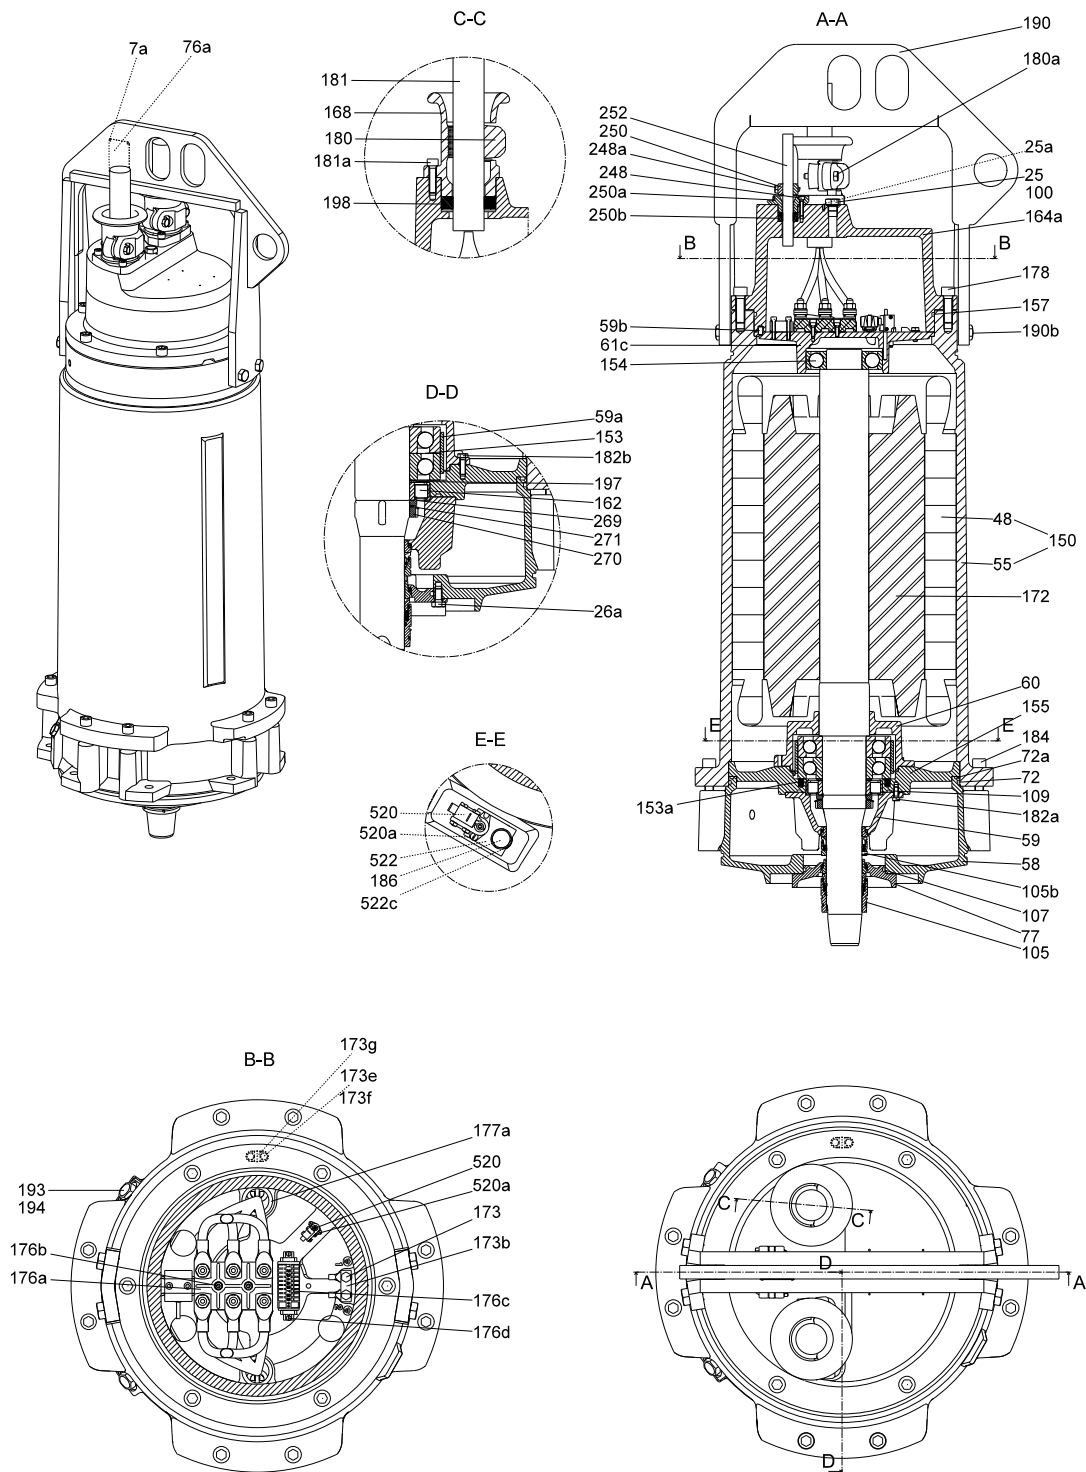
Explosion-proof motor, without cooling jacket (installation type S)
